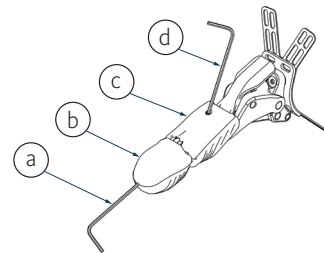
(a) 1.5 mm Hex Wrench, (b) Device Tip, (c) P2 Fairing, (d) 0.89 mm Hex Wrench
